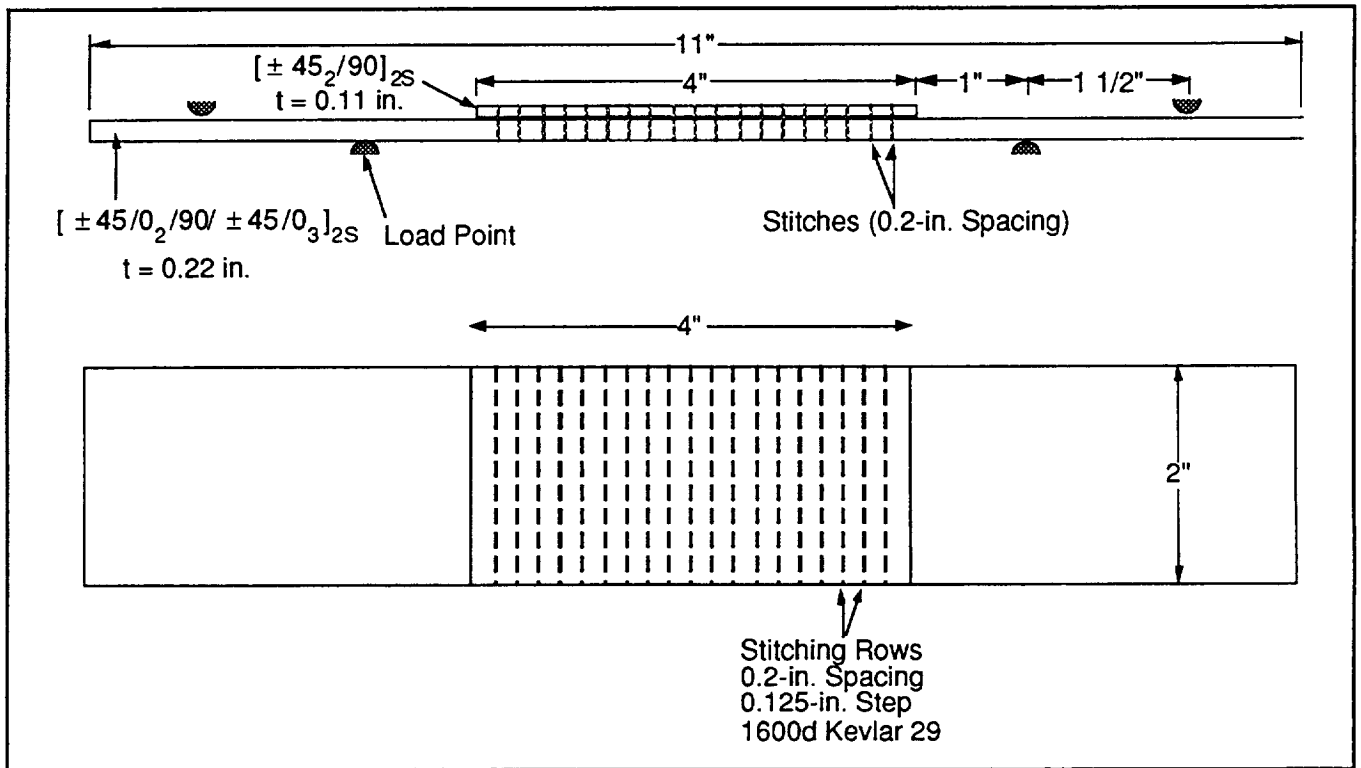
Four-point Bending Specimen with Stitched, Attached Flange
